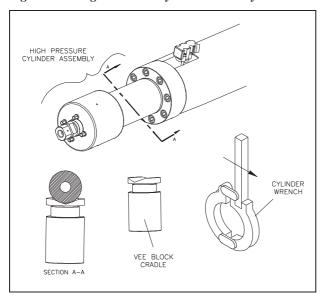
High Pressure Cylinder Assembly Removal and Installation
